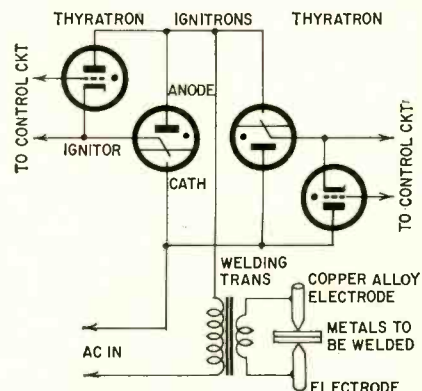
Back-to-back circuit controls welding current without rectifying it. Thyatrons permit delayed firing of ignitrons.
